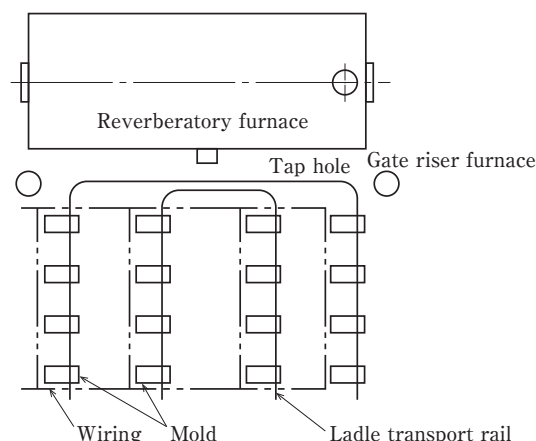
Layout of reverberatory furnace and molds¹⁾.
